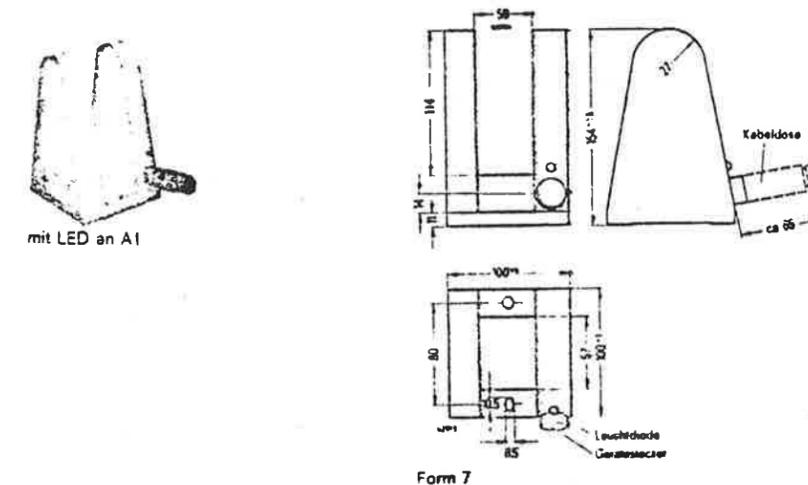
BERO SENSOR (DIMENSIONS SHOWN IN MILLIMETERS)
